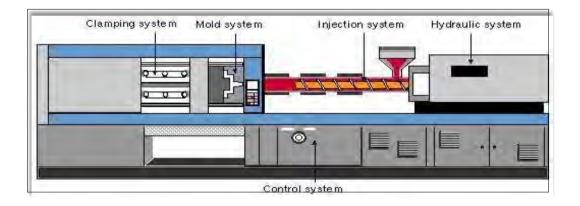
Injection molding machine for thermoplastics ource: (Source: http://www.capetronics.com>20/11/14)
